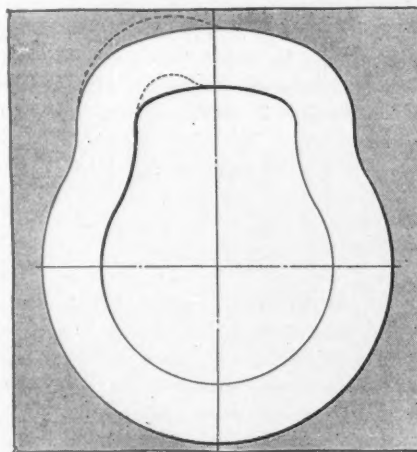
CAM FOR 2,000 R. P. M. MOTOR
